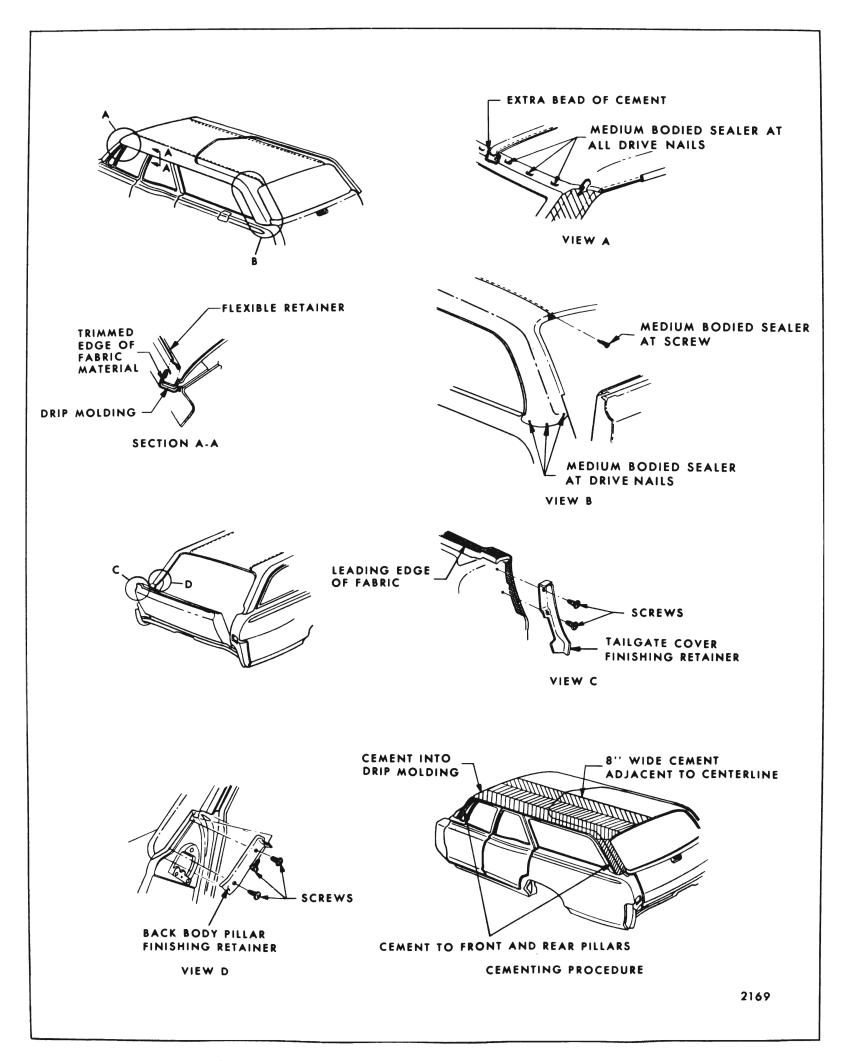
Fabric Roof Cover Installation - Station Wagon Styles
